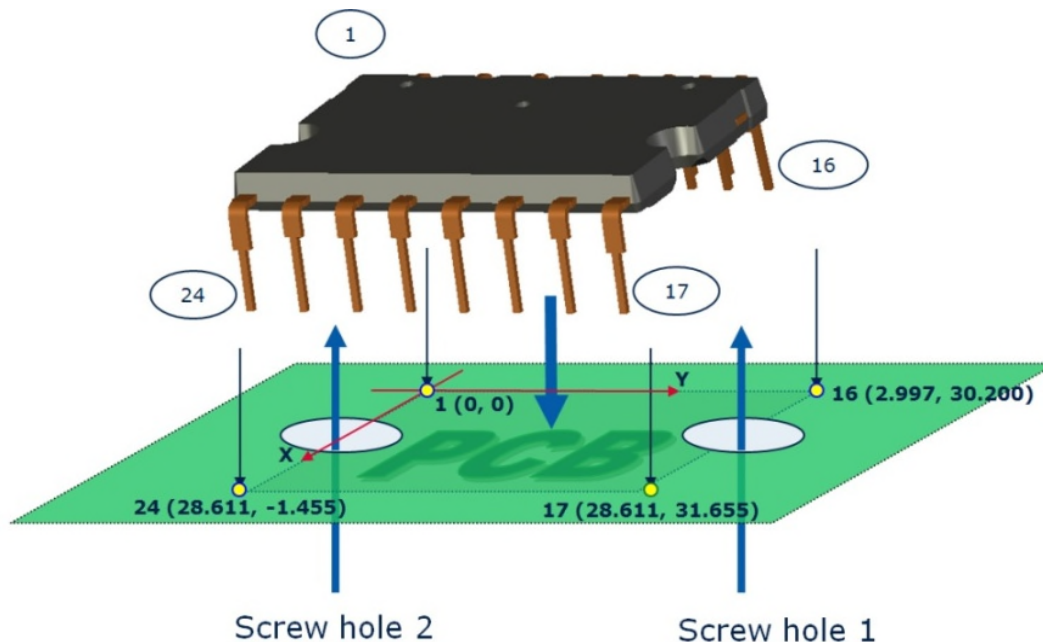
CIPOS™ Mini package position on PCB (Unit: [mm])
